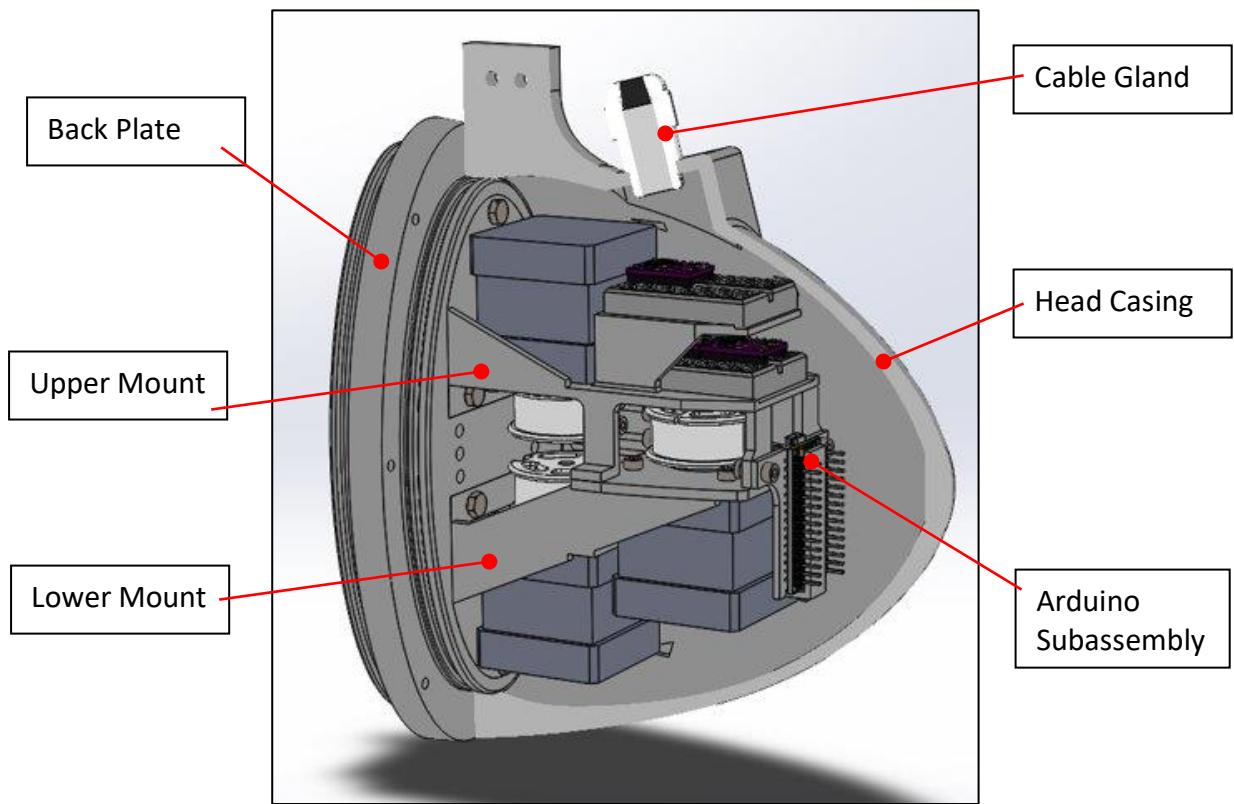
Full Head Subassembly with Head Casing and cable gland cross-sectioned to show interior
